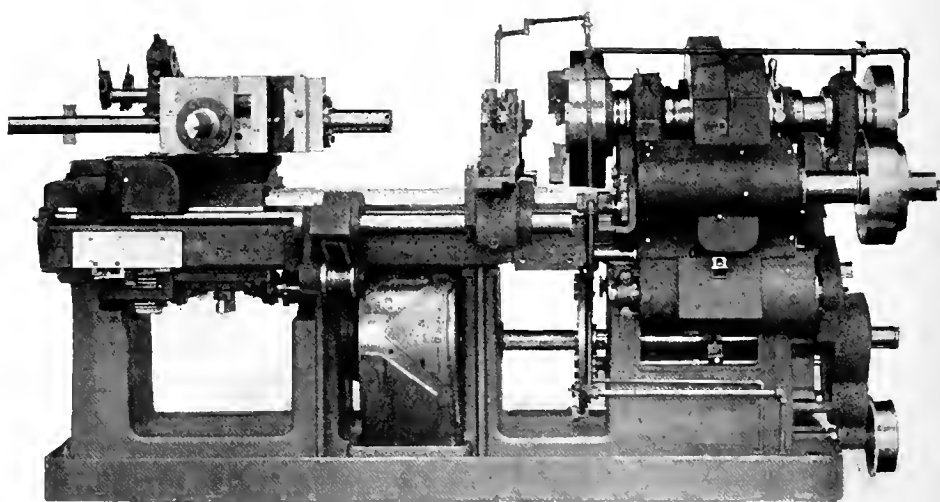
Rear View of the "Long Travel" Automatic Chucking Machine.
